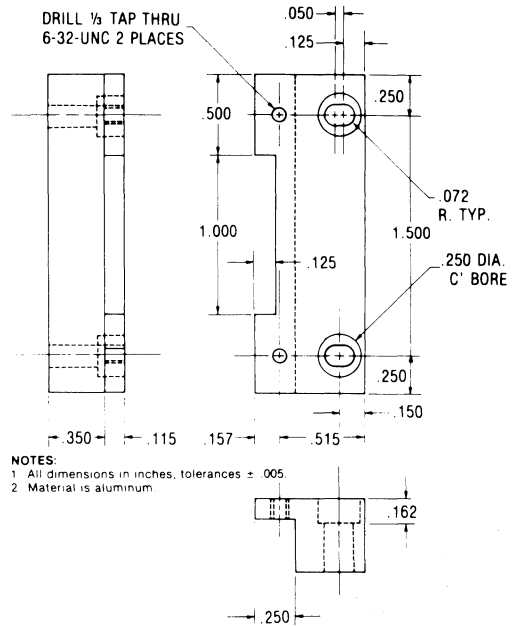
Adapter for Hermetic Package to Standard Hybrid Amplifier Test Fixtures
